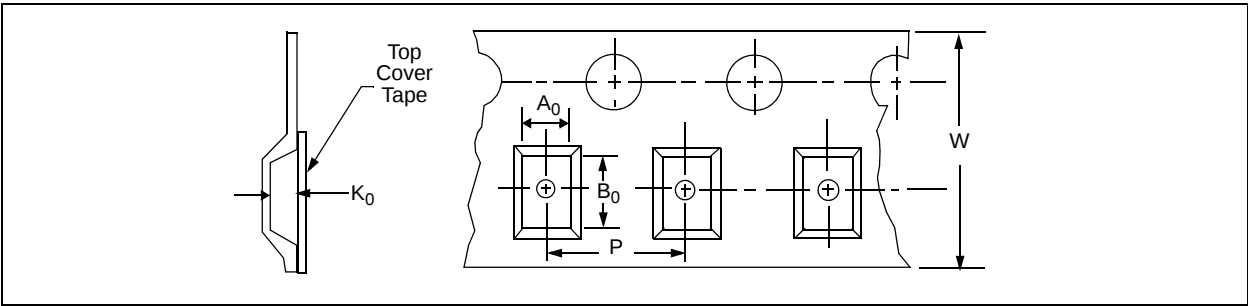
Embossed Carrier Dimensions (8, 12, 16 and 24 mm tape only).
